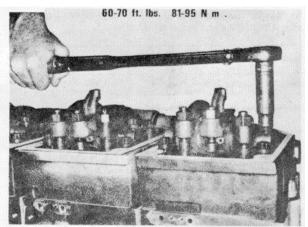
N-62. Tighten the Rocker Lever Assembly Capscrews
